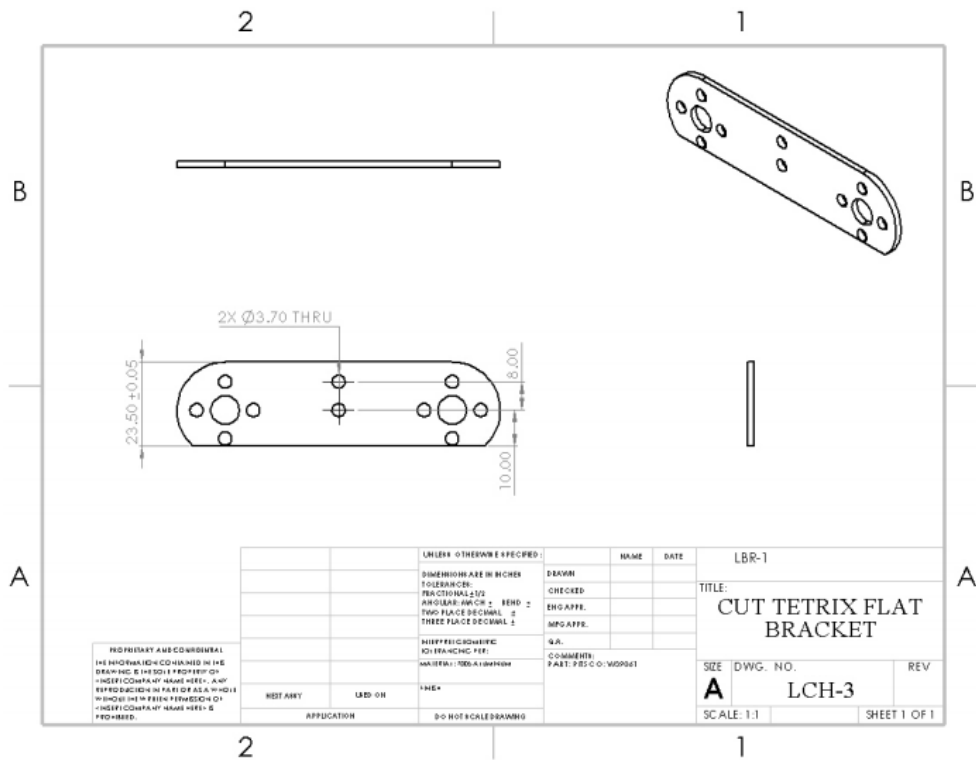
Part drawing of the modified TETRIS flat bracket for the dual hook assembly
